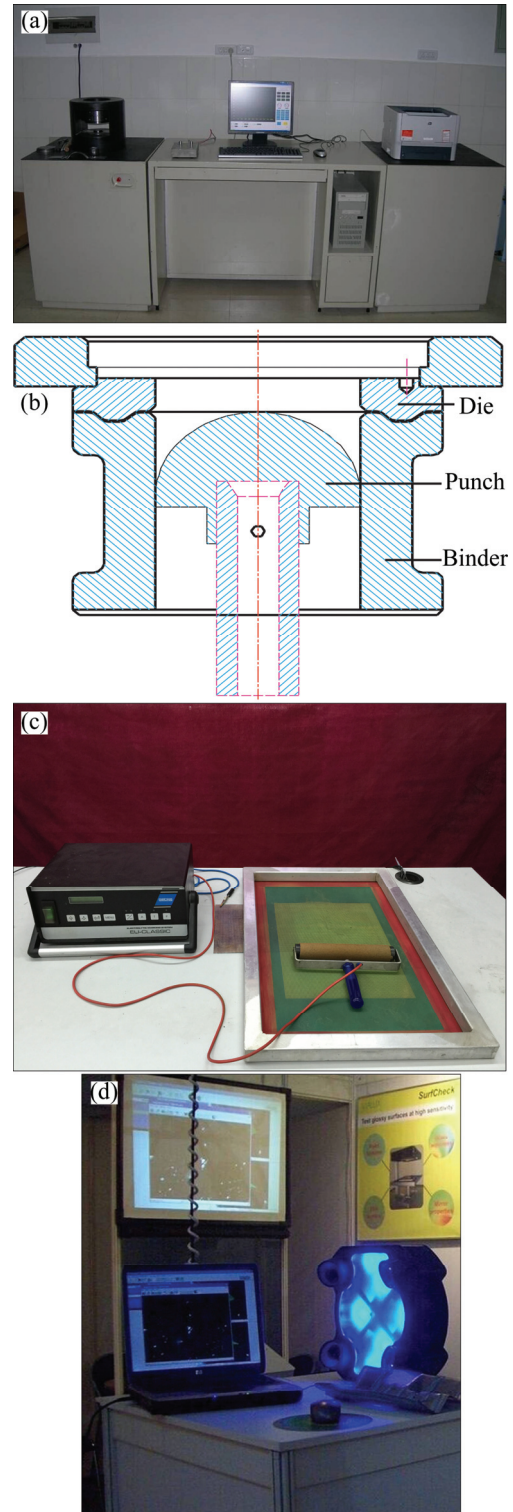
Hemispherical punch bulging test set-up: (a) Sheet metals forming performance test machine; (b) Schematic diagram of bulging test mould; (c) Electric corrosion marking machine; (d) AutoGrid Comsmart strain measurement system
